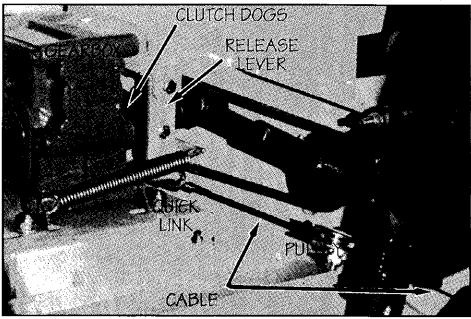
SAFETY BAR CABLE COMPONENTS (FEED ROLL GUARD REMOVED)
